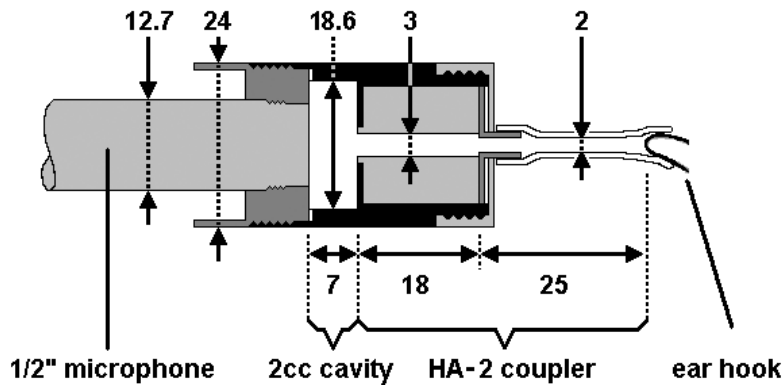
Drawing of a HA-2 2cc coupler according to the specifications of IEC126 made by Bruel & Kjaer. The coupler is mounted on a 1/2 inch microphone. Sizes in millimeters. Drawing by the author.
